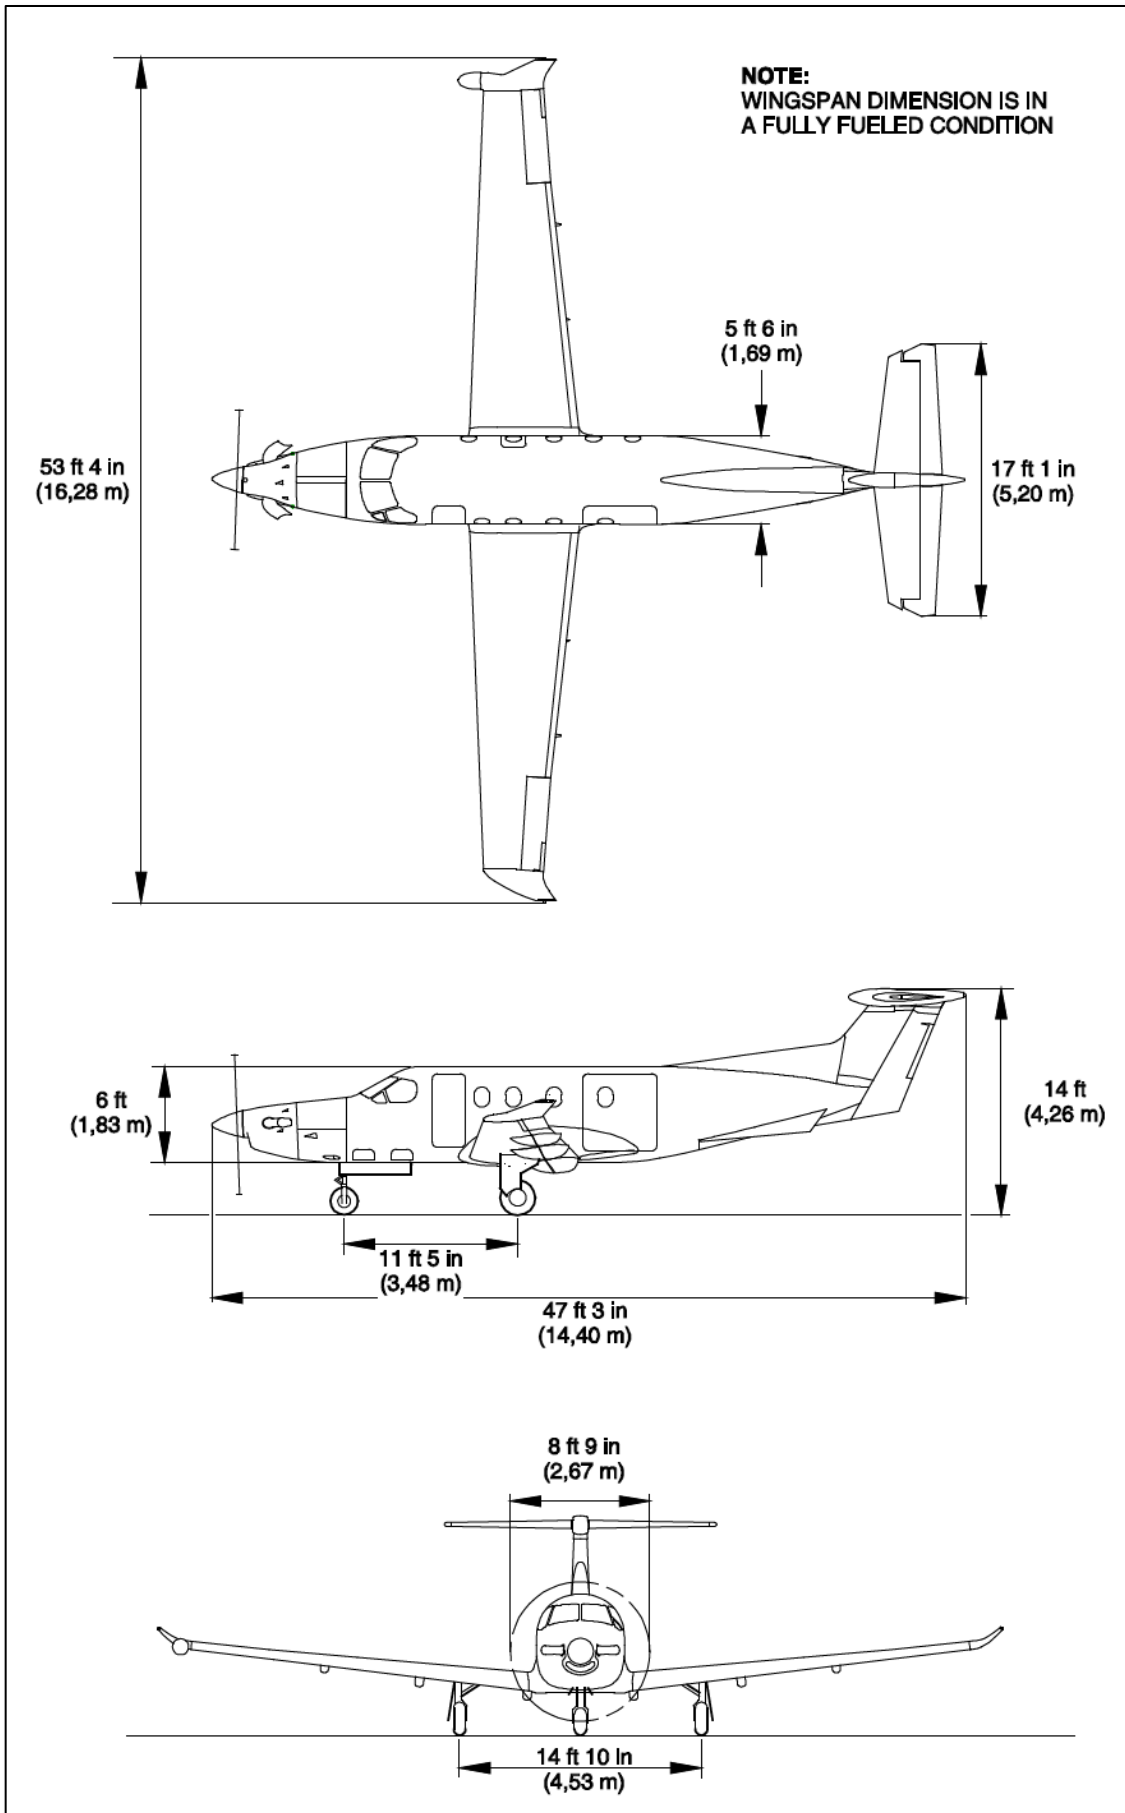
Pilatus PC-12/47E three-view drawing with dimensions, from Reference 3.
